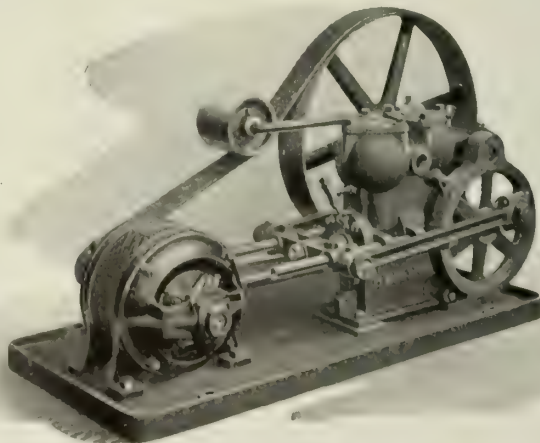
WITH TYPE "C" DRIVE AND MOTOR
